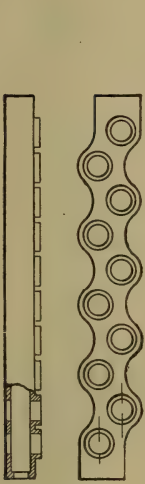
Details of Header — Babcock and Wilcox Boiler.
